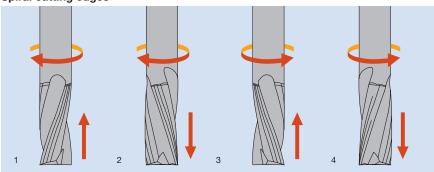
RH-RD positive twist, workpiece face side to bottom, good chip flow into dust extraction.
